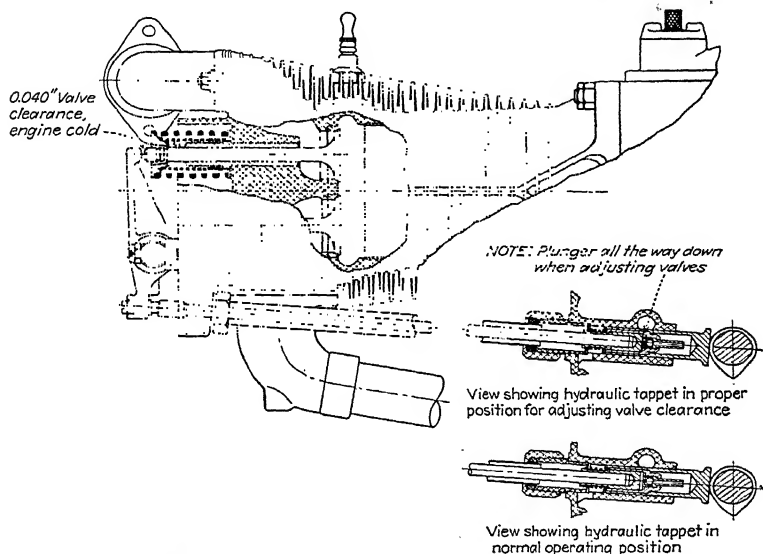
Arrangement of the valve gear used on the Franklin 50-hp. valve-in-head engine.
